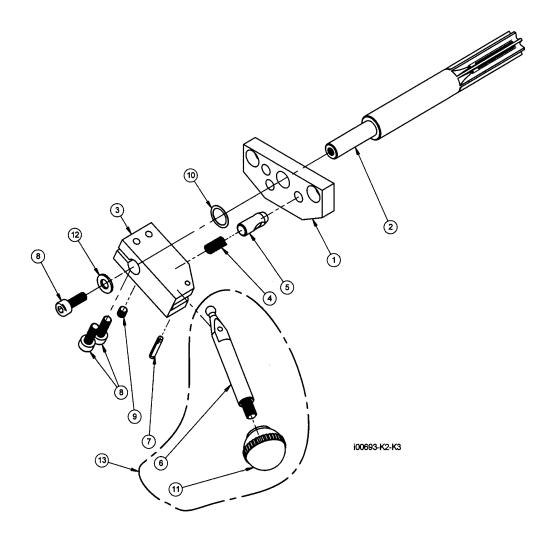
Gear Housing P/N: 20778-1 Figure 120 Hi-Low Shift Clutch Sub-Assembly P/N: 20778-2
